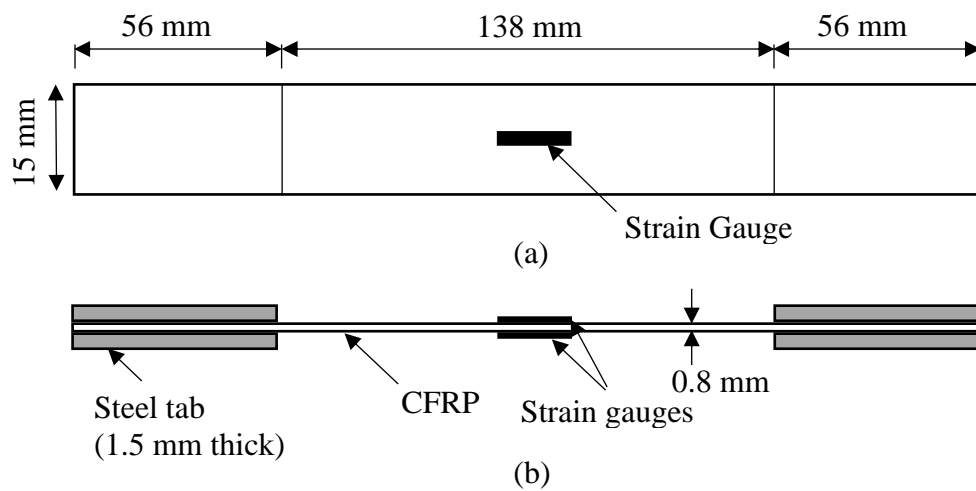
Schematic diagram of a CFRP coupon test specimen (a) Plan view
